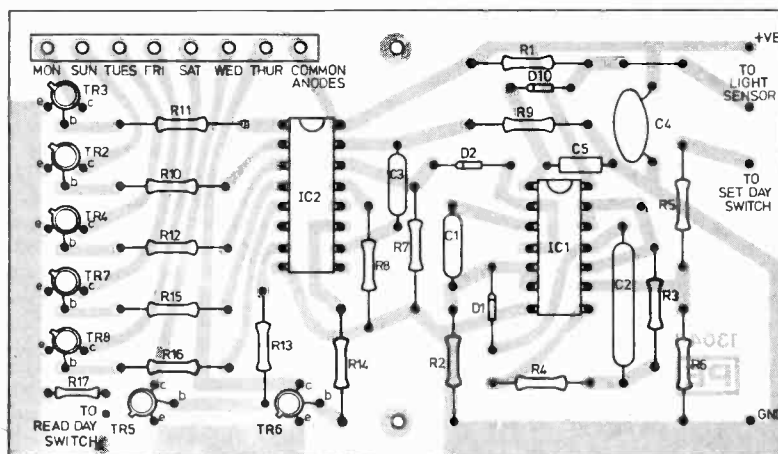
Printed circuit and component layout of prototype. Note that on the prototype, resistors R18 to R23 have been eliminated by placing R17 in series with the Read Day switch.
